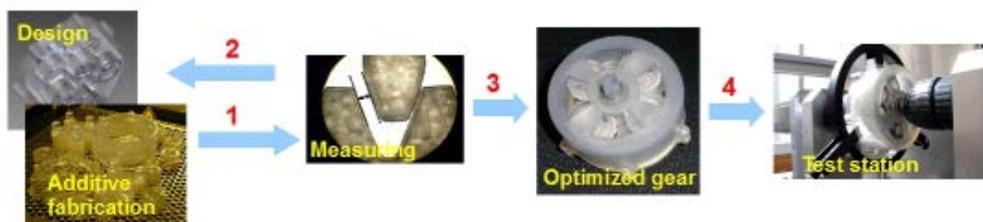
Process chain Additive Manufacturing of high reduction gears.
